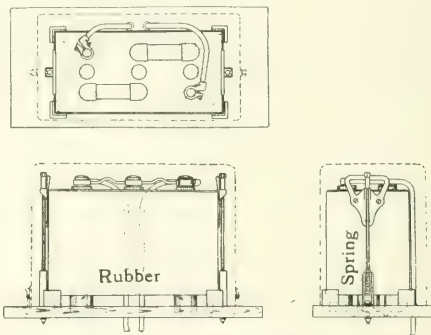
METHOD OF MOUNTING A BATTERY ON TRUCKS
